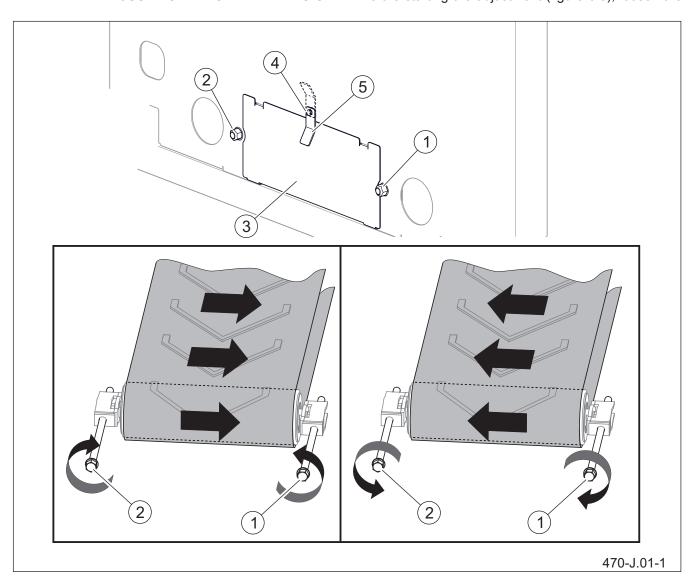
Adjustment of tightening roller (1)(2) adjustment bolts
